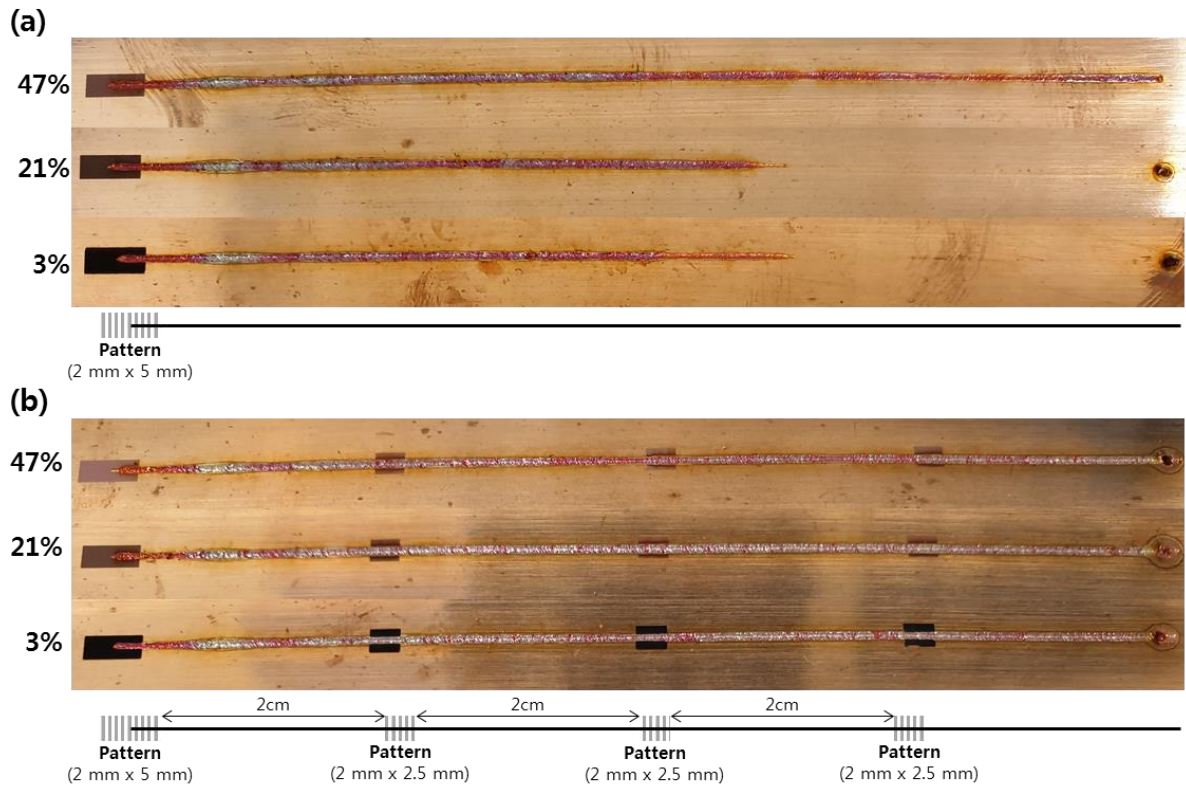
A Top view of results using welding process conditions of 1800 W and 200 mm / s. (a) welding results obtained by fabricating patterns with reflectance of 3%, 21% and 47% only at the beginning of the weld. (b) welding results obtained by machining patterns with reflectances of 3%, 21%, and 47% at 2 cm intervals.
